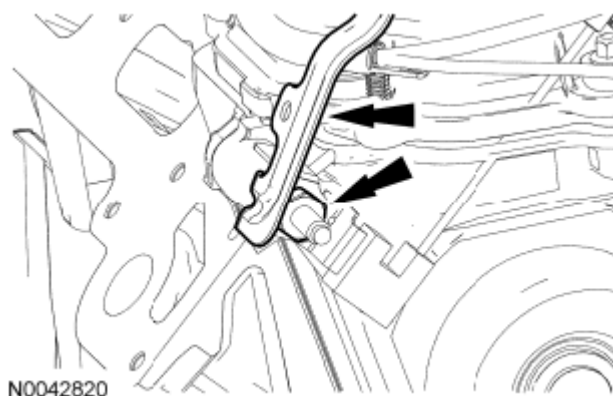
Locating Cooling Fan Wiring Harness Bracket And Nut
